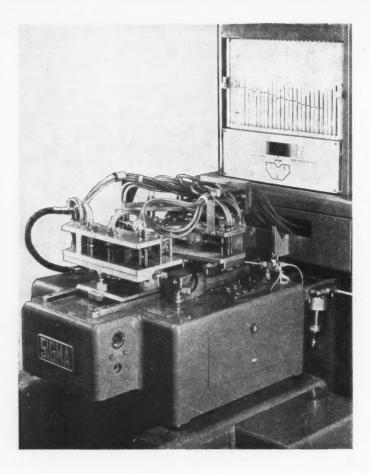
Inspection machine for controlling assembly of aluminium plates in high accuracy variable condenser stator unit.
